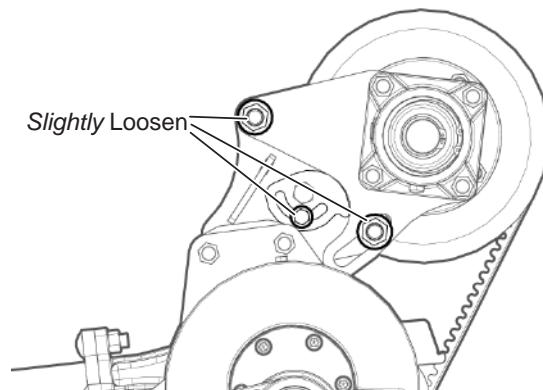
Knife Belt Tension - loosen lock nuts and bolt
